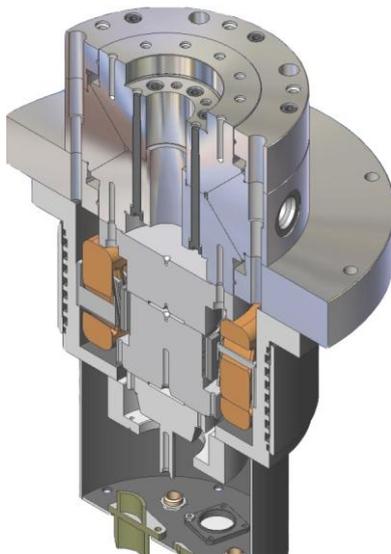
Sectioned view of the bi-conic spindle with optional brushless motor and encoder.
